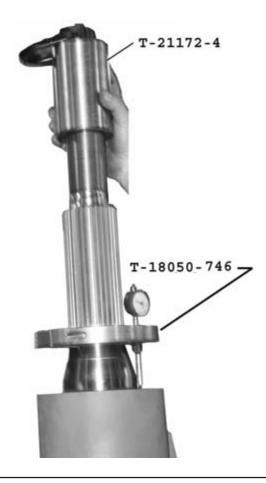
Turn Over and Install Dial Indicator T-18050-746
